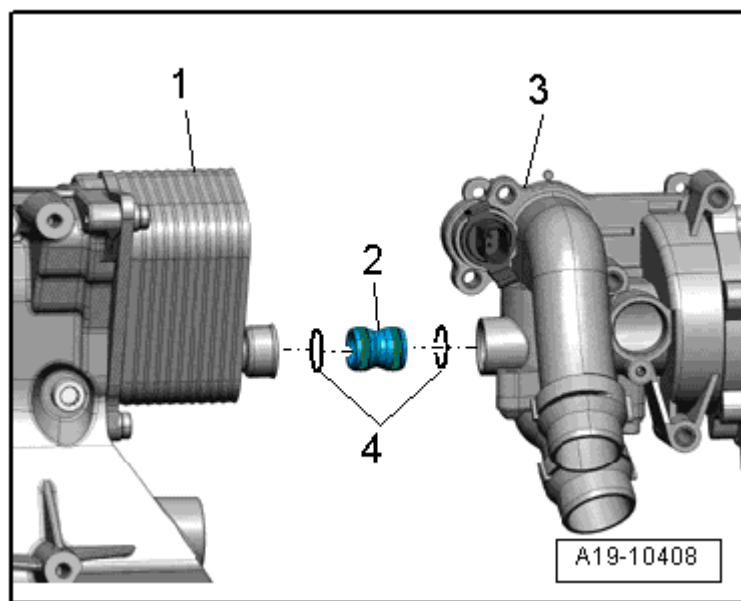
Identifying Accessory Assembly Bracket, Coolant Pump Housing, Connection And O-Rings
